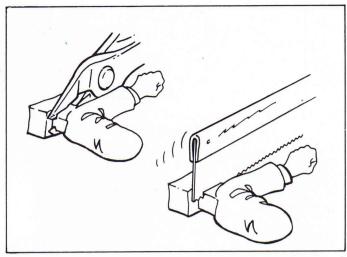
Removal of the secondary carrier should be done with a pair of flush cut nippers or with an X-acto handsaw, depending on the size of the part and the carrier.
